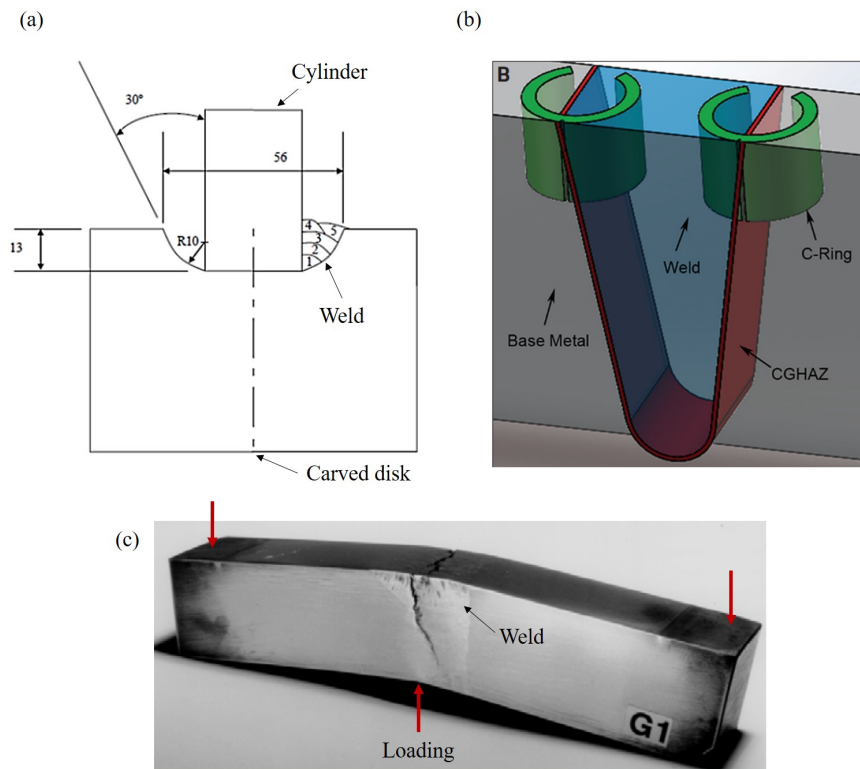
Illustration of SRC testing specimens using industrial welds, with (a) section of a Borland specimen [3], (b) C-ring specimens extracted from a weld [179] and (c) 3-points bending test of a 800 h welded joint after failure [150].
